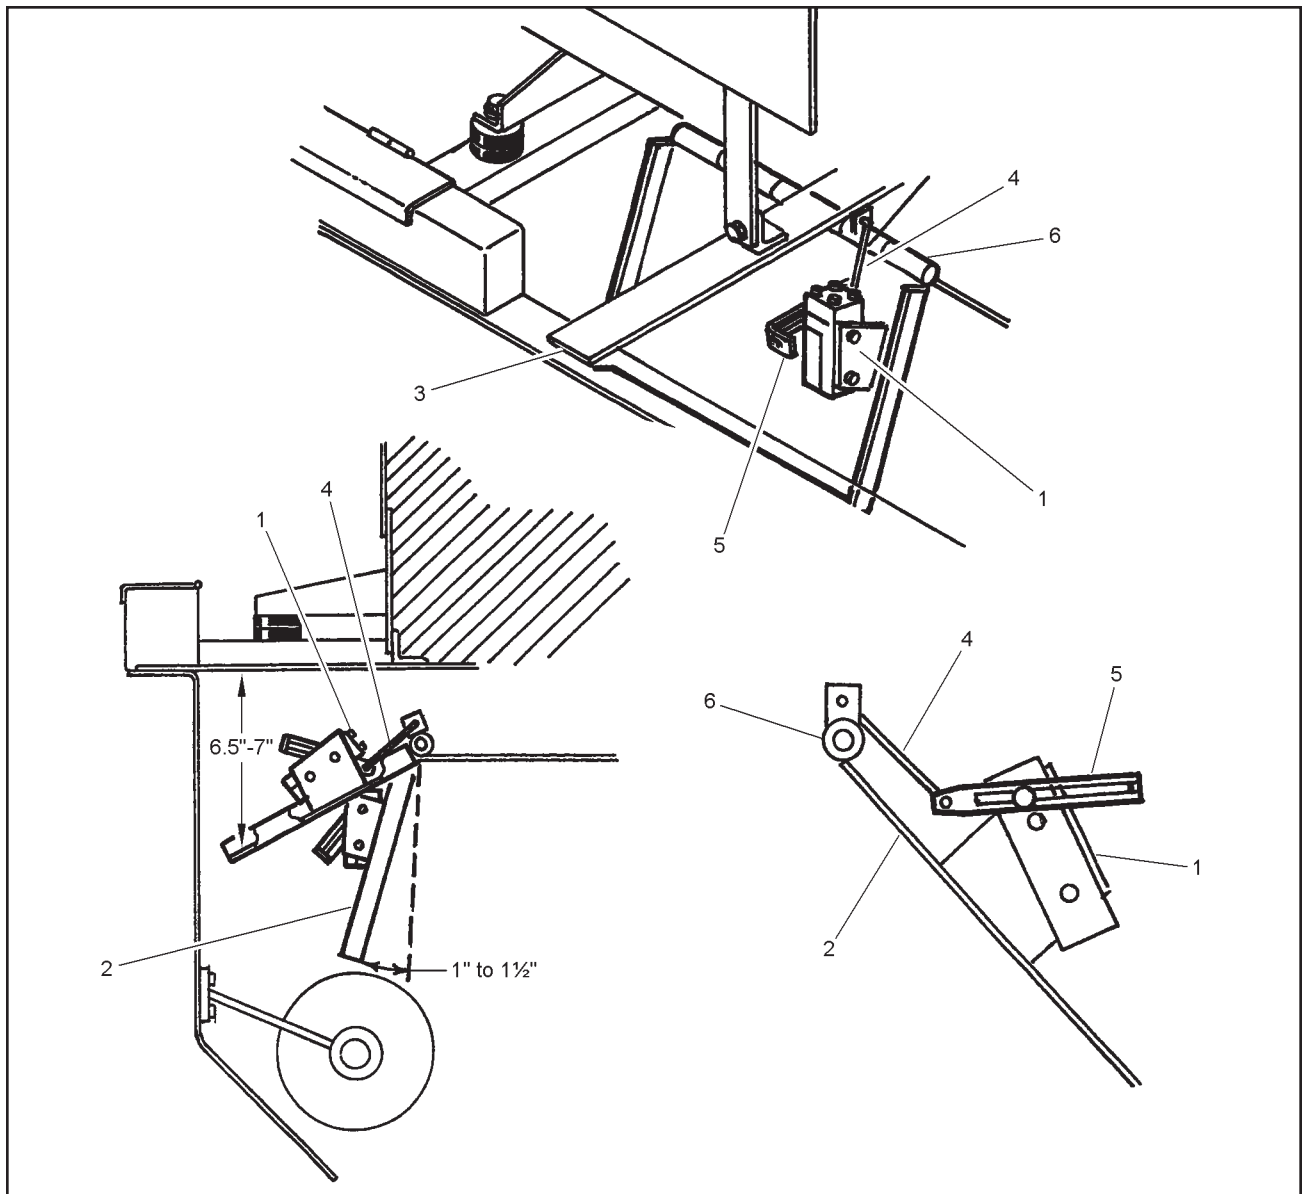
CONVEYOR MICRO-SWITCH LOCATION
